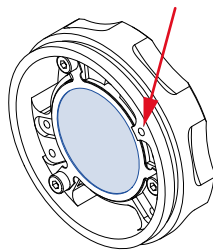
Position to cut off the thread plug on the backside of the mount adapter.
